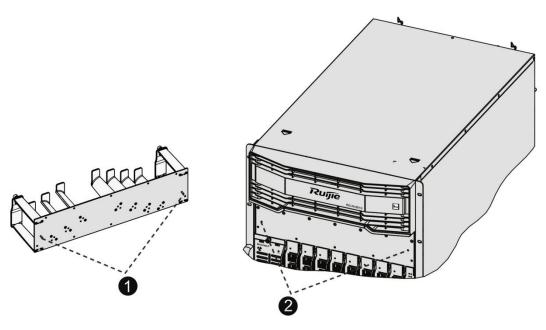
Mounting the Cabling Rack for RG-N18012
